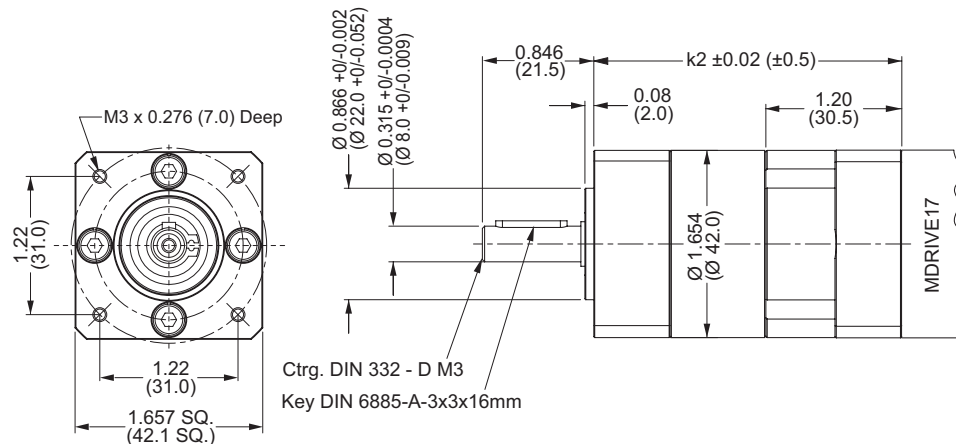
Planetary Gearbox Specifications for MDrive17Plus
